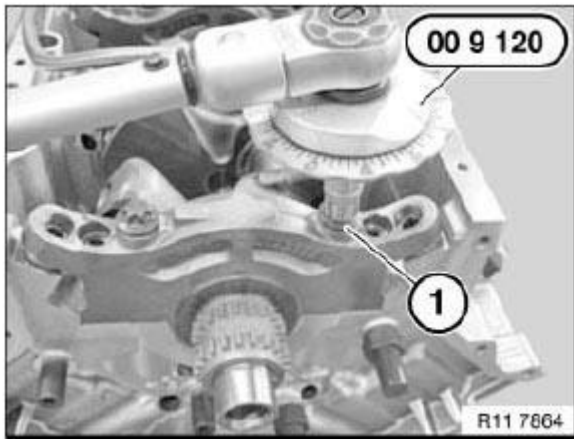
Secure Collar Bolt (1) With Special Tool 00 9 120
